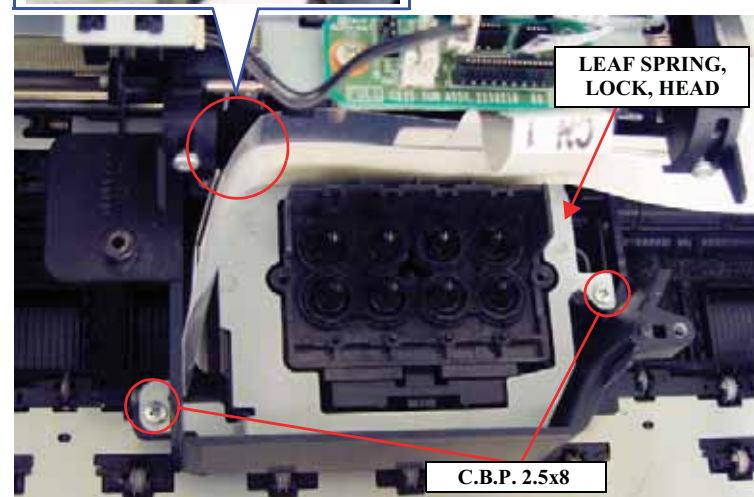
Removing the LEAF SPRING, LOCK, HEAD
